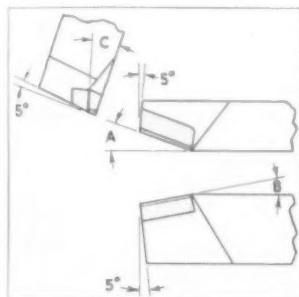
Negatives rake lathe tool for straight turning. Side cutting angle and back rake negative; side rake positive. A=Side cutting angle, B=Back rake, C=side rake.
